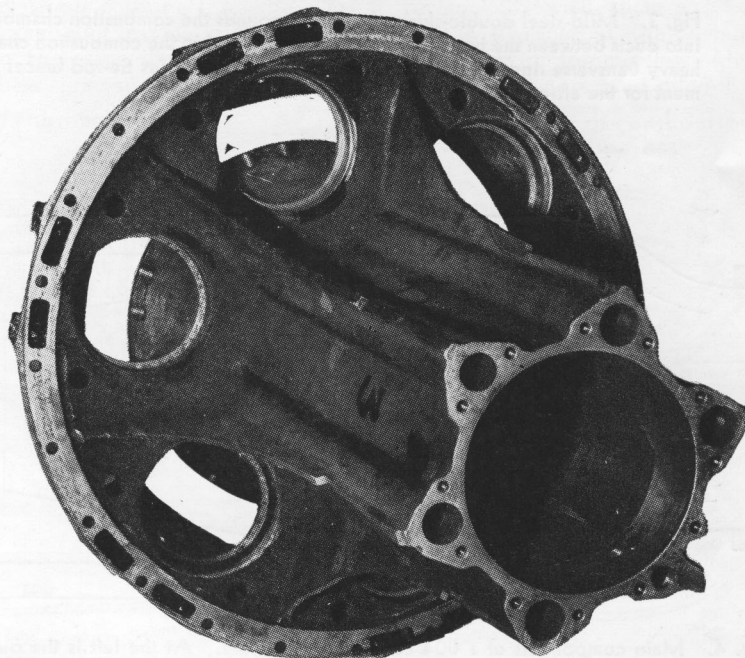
Main casting rear view showing rectangular cooling air passages and six combustion chamber inlets. The five large cored passages in the base of the ribs are cooling air passages; the smaller is the oil line. The aft turbine bearing fits in the rear end of this casting.
